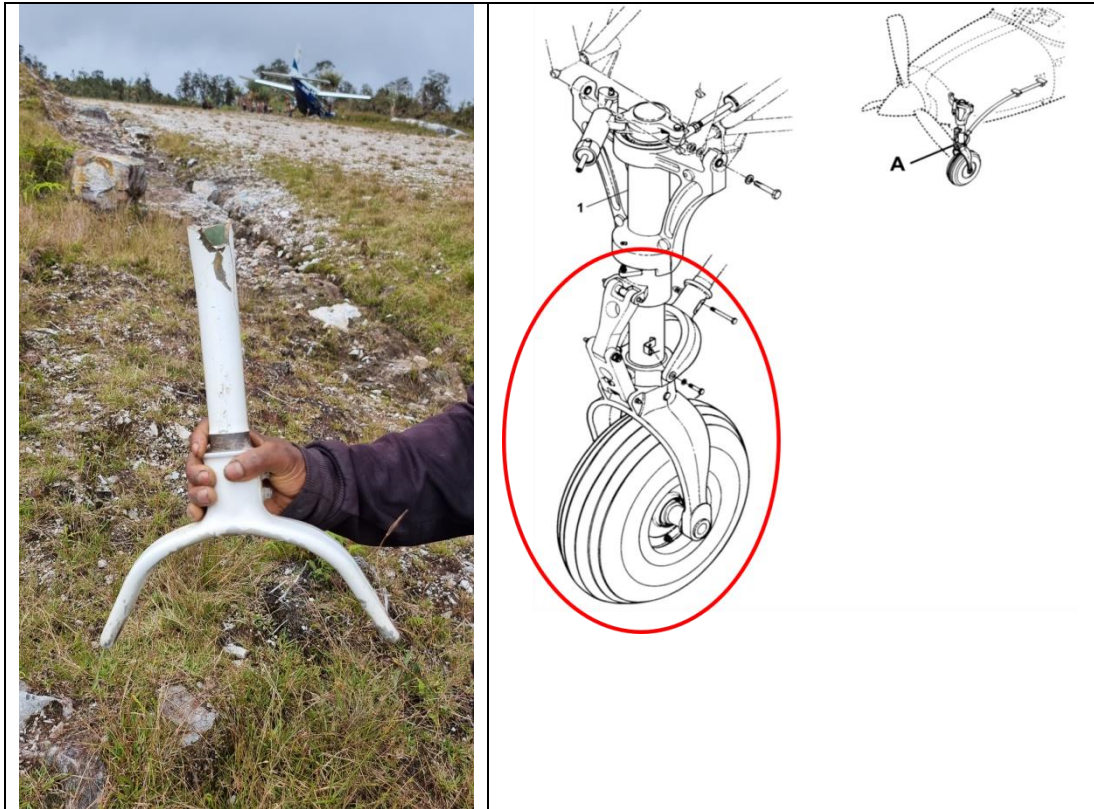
The widening of the nose gear spring (drag link spring) fork end
